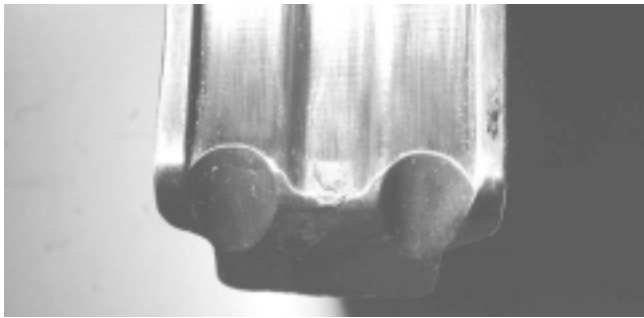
Fitting Material Build-Up Requiring Jaw Cleaning
